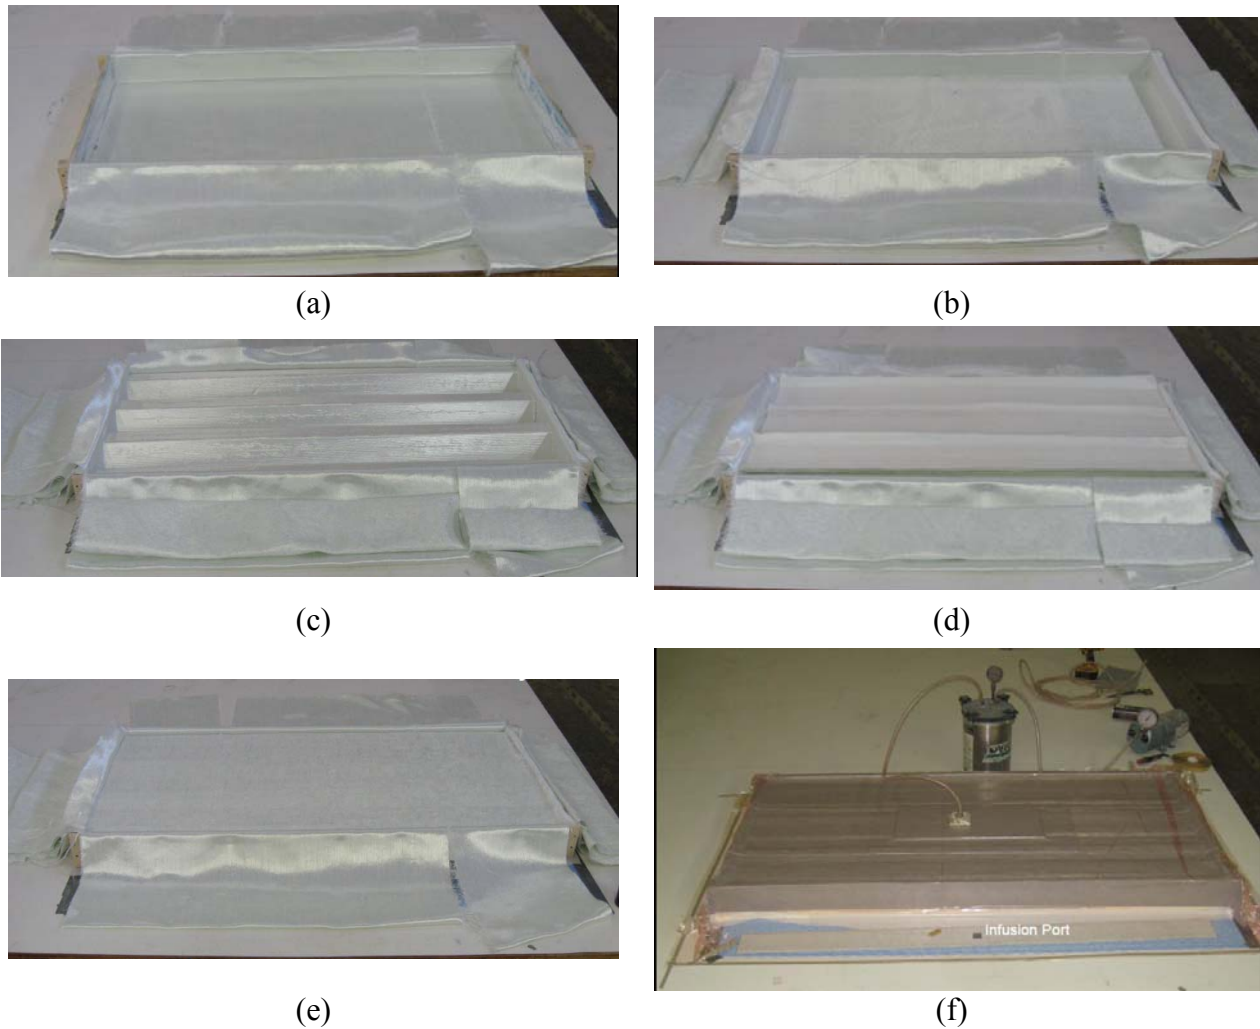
Manufacturing Process of a Scaled FRP Bridge Deck: (a) Laying Transverse Layers; (b) Laying Longitudinal Layers; (c) Installing Bottom Foams; (d) Laying Shear Layers and Installing Top Foams; (e) Folding Transverse and Longitudinal Layers; and (f) VARTM Process (Courtesy of Structural Composites Inc.)
